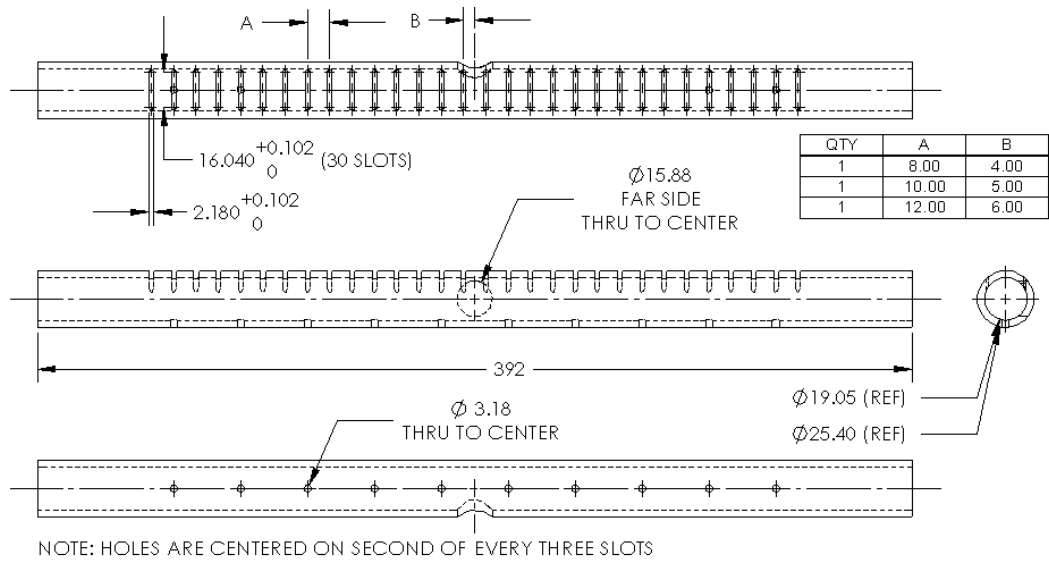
Drawing of Transparent Tubes, with Dimensions in millimeters
